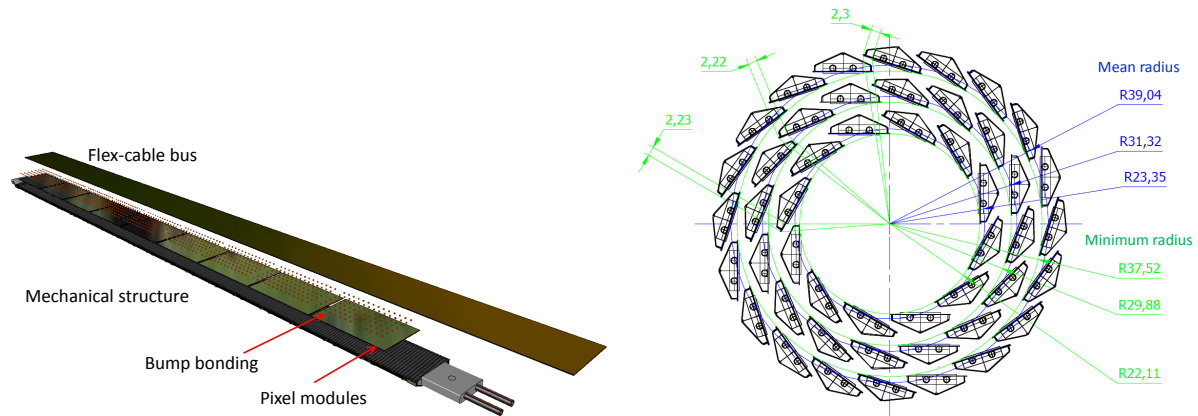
Sketch of the building blocks constituting a generic stave (left) and front view of their positioning around the beampipe to form the Inner Barrel (right).
